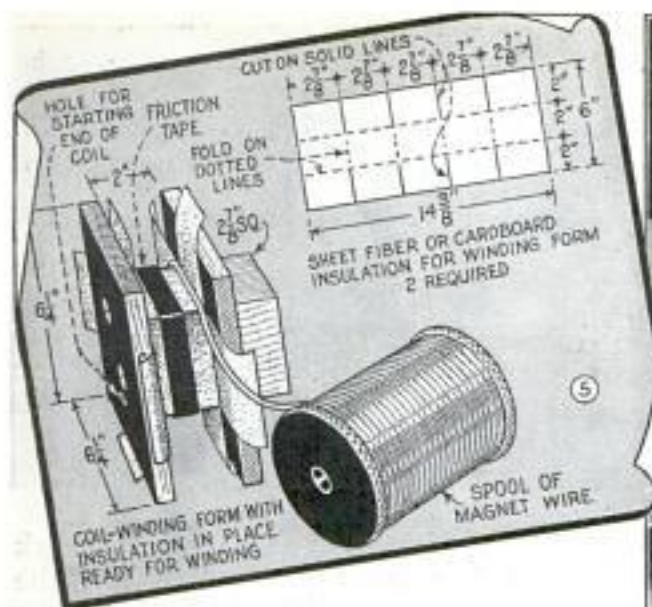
shows dimensions for a coil-winding form used as in Fig. 6, and a pattern for cutting sheet fiber or tough cardboard to serve as insulation for the coils. One of these insulating pieces is placed on the winding form, as shown in the illustration, before winding each coil. The first coil, or line coil, is wound with exactly 44 turns of No. 8 double cotton-covered (d.c.c.) magnet wire. This coil will require about  $4\frac{1}{2}$  lb. or 60 ft. of wire. When the coil is complete, it may be slipped off the form after removing the end block. The coil is next bound with tape, Fig. 9. The other or welding coil is wound in the same manner from No. 4 d.c.c. wire. Fifty-one turns of this wire are required. If wire of this size is not at hand, four strands of No. 10 wire may be wound on at the same time, as if they were one wire. All of the starting and finish ends should be soldered together, which will produce a winding equivalent to one No. 4 wire. If the latter size wire is used, 14 lb. or 85 ft. will be required. If four No. 10 wires are used, 13 lb. or 350 ft. will be required. When the coils have been wound and taped they may be slipped over the legs of the core and connected as in Fig. 7. In this diagram, lines have been used to represent the coils so that the direction of the
